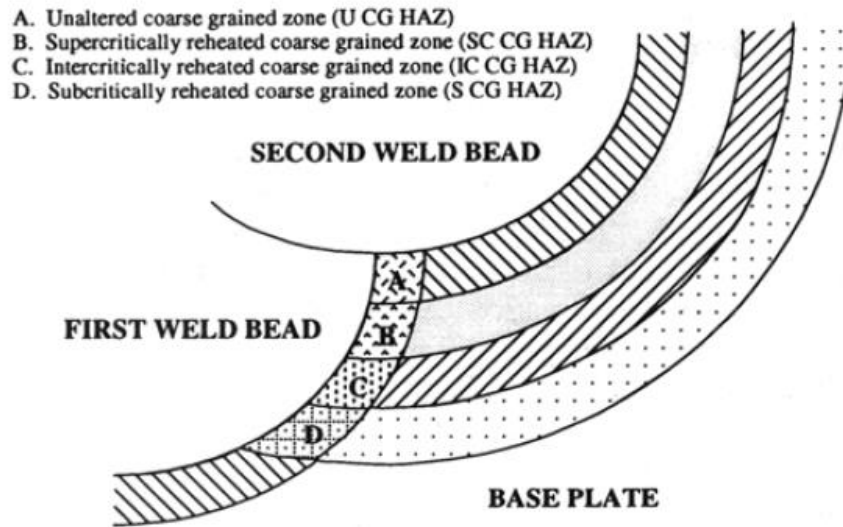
Schematic diagram of a multipass weld [9].
